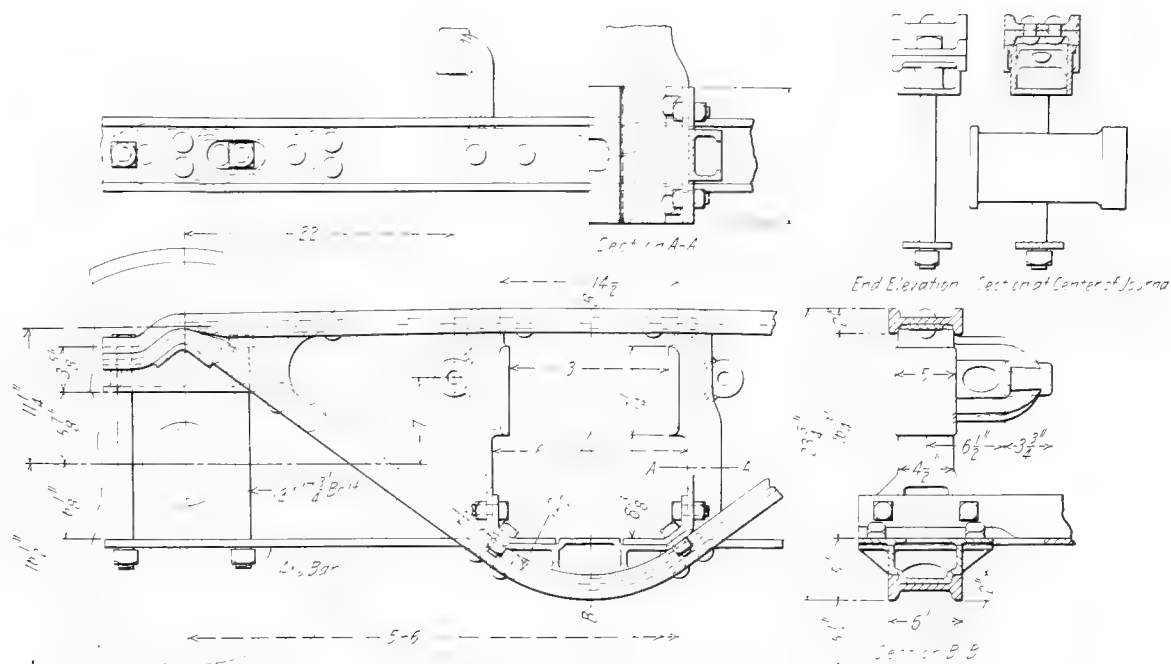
Built-Up Steel Side Frame. Summers Steel Car Company
